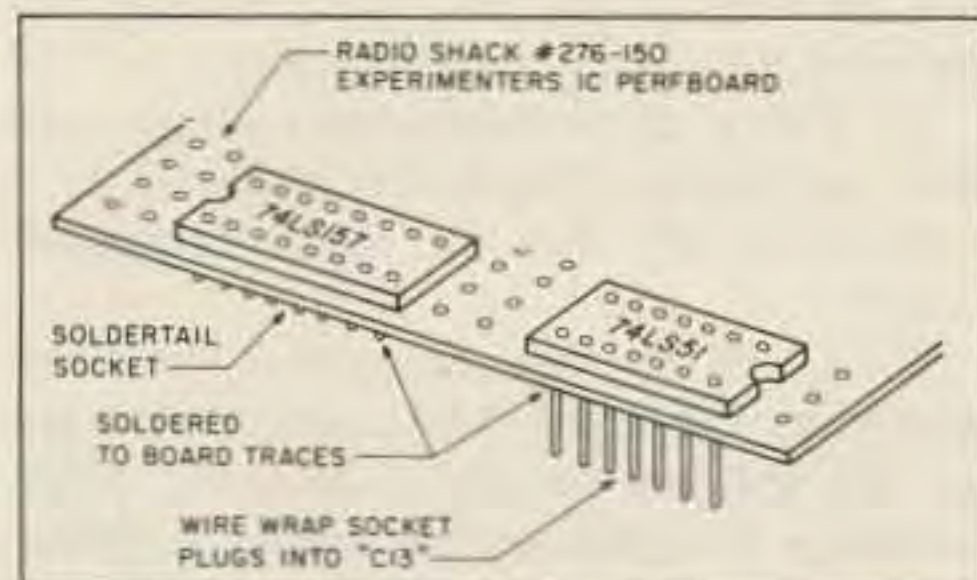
Edge of the Radio Shack #276-150 perfboard, on which the video adapter circuit is wired. Remove the 74LS51 IC from its socket on the motherboard, insert socket plugs, and reinsert the chip into the socket.
